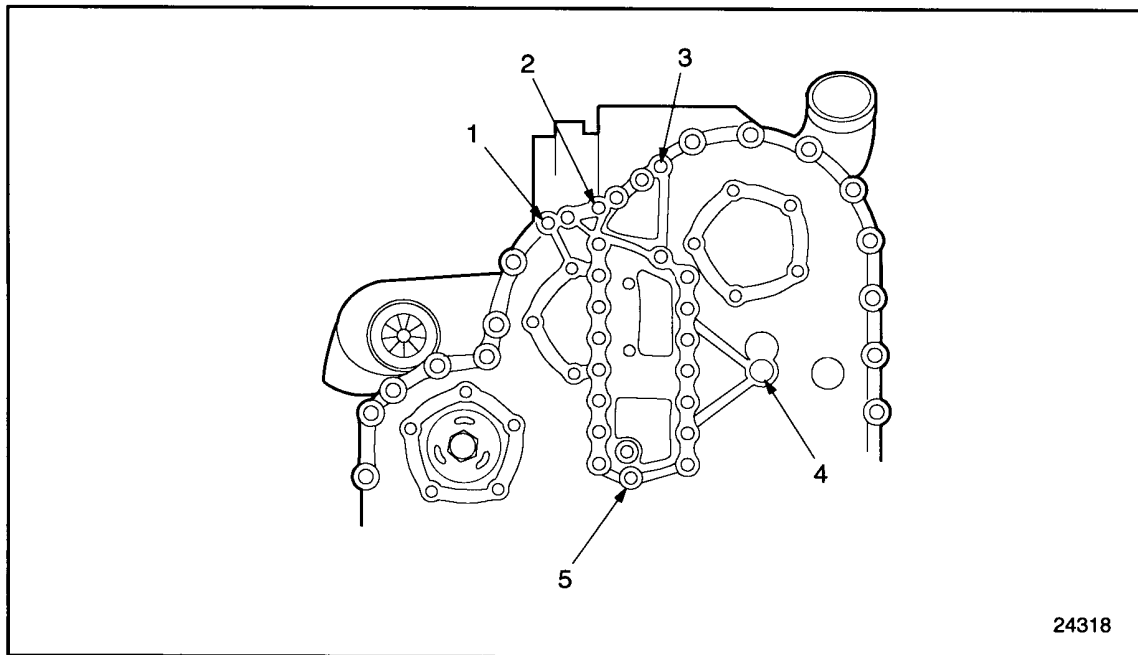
Camshaft Drive Gear Access Cover Bolt Torque Sequence
